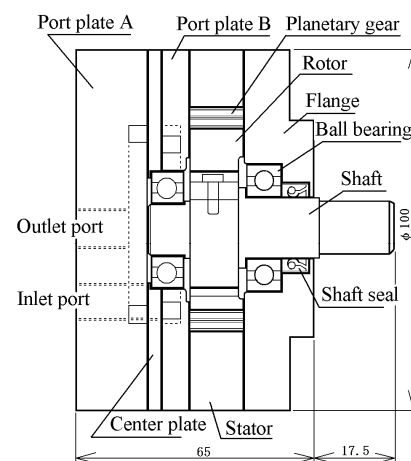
Cross sectional drawing of water hydraulic planetary gear motor
